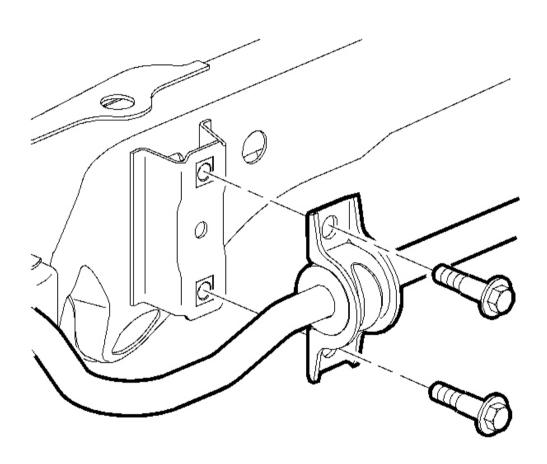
Stabilizer Bar Clamp & Bolts Courtesy of GENERAL MOTORS CORP.
